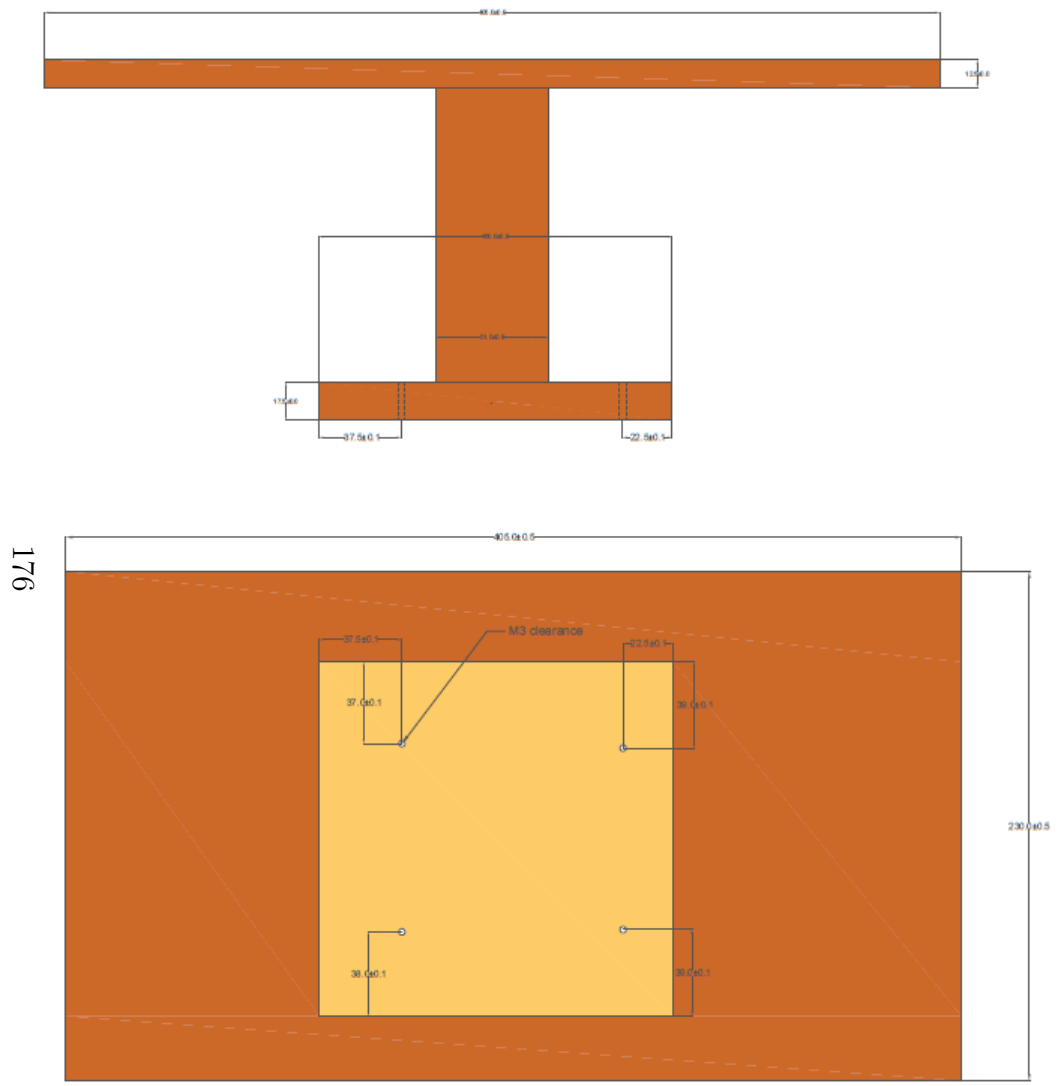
Mounting bracket for hot side of TEC to copper heat sink
